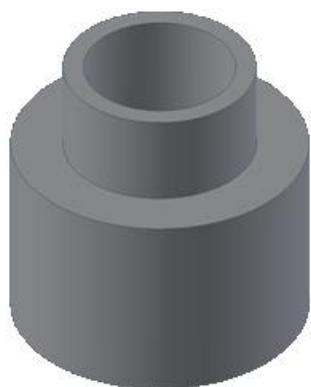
The hub base template provided by the test pump manufacturer, upon which the impeller blades were added.
